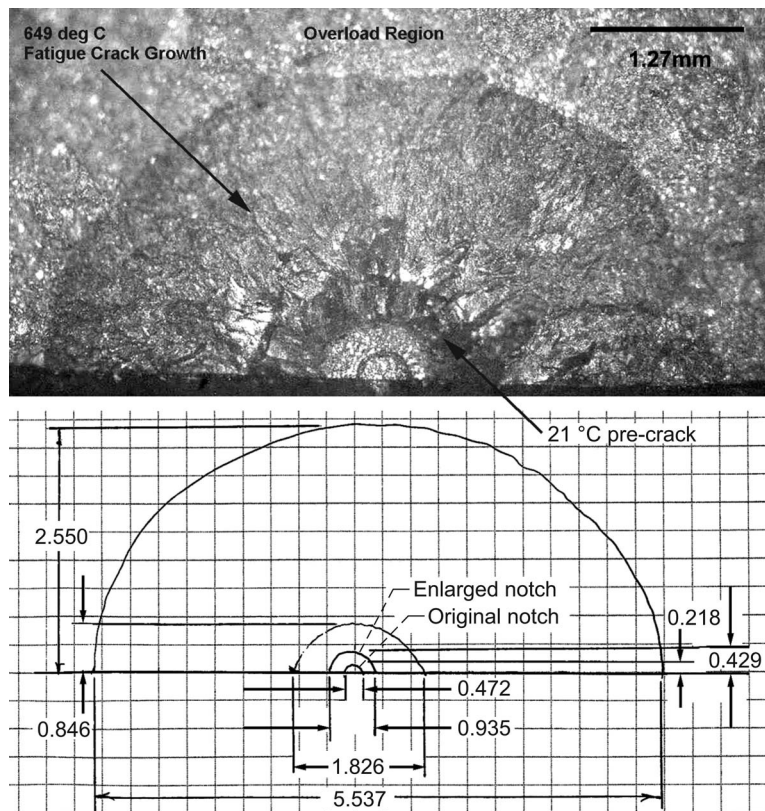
Fracture surface measurements for the GXMM247 ( $K_b$  specimen 13K). Dimensions are in millimeters.
